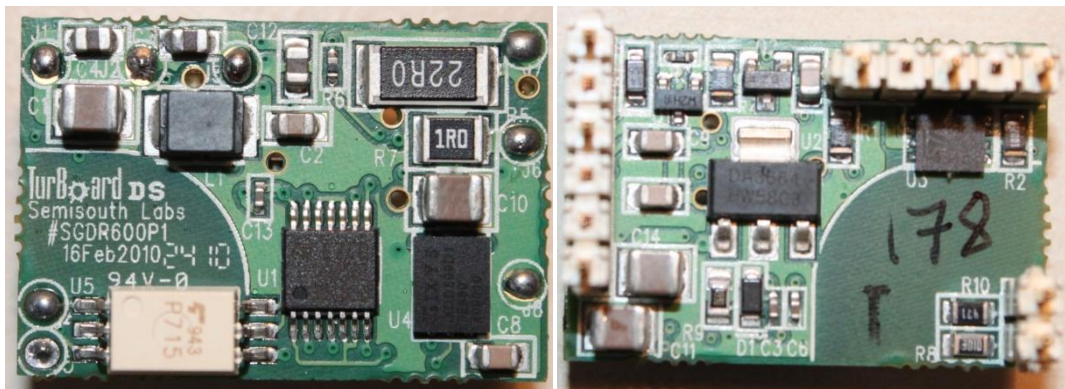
SGDR600P1 Gate driver layout. Left: top. Right: bottom [29]
